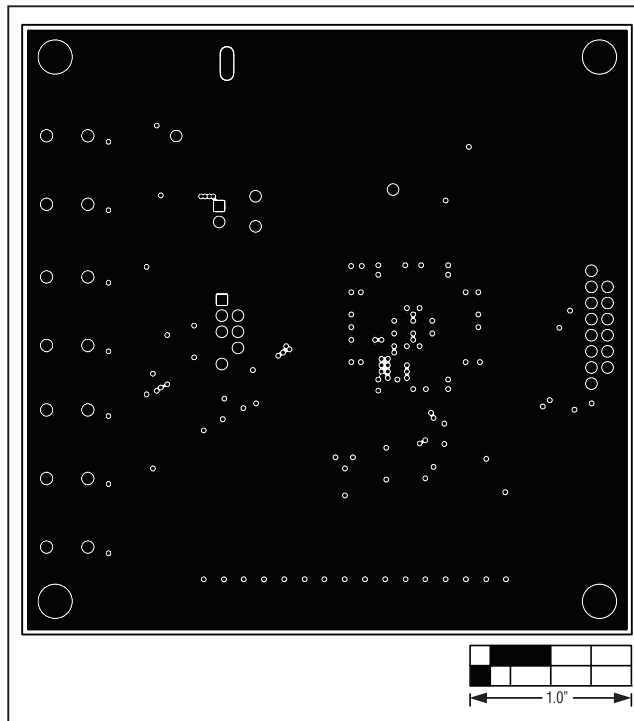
MAX4940 Master Board PCB Layout—Ground Layer 2
